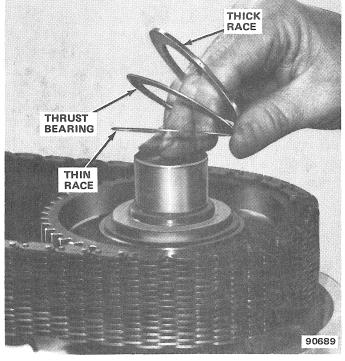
D-49 Front Output Shaft Rear Thrust Bearing Assembly Removal/Installation
